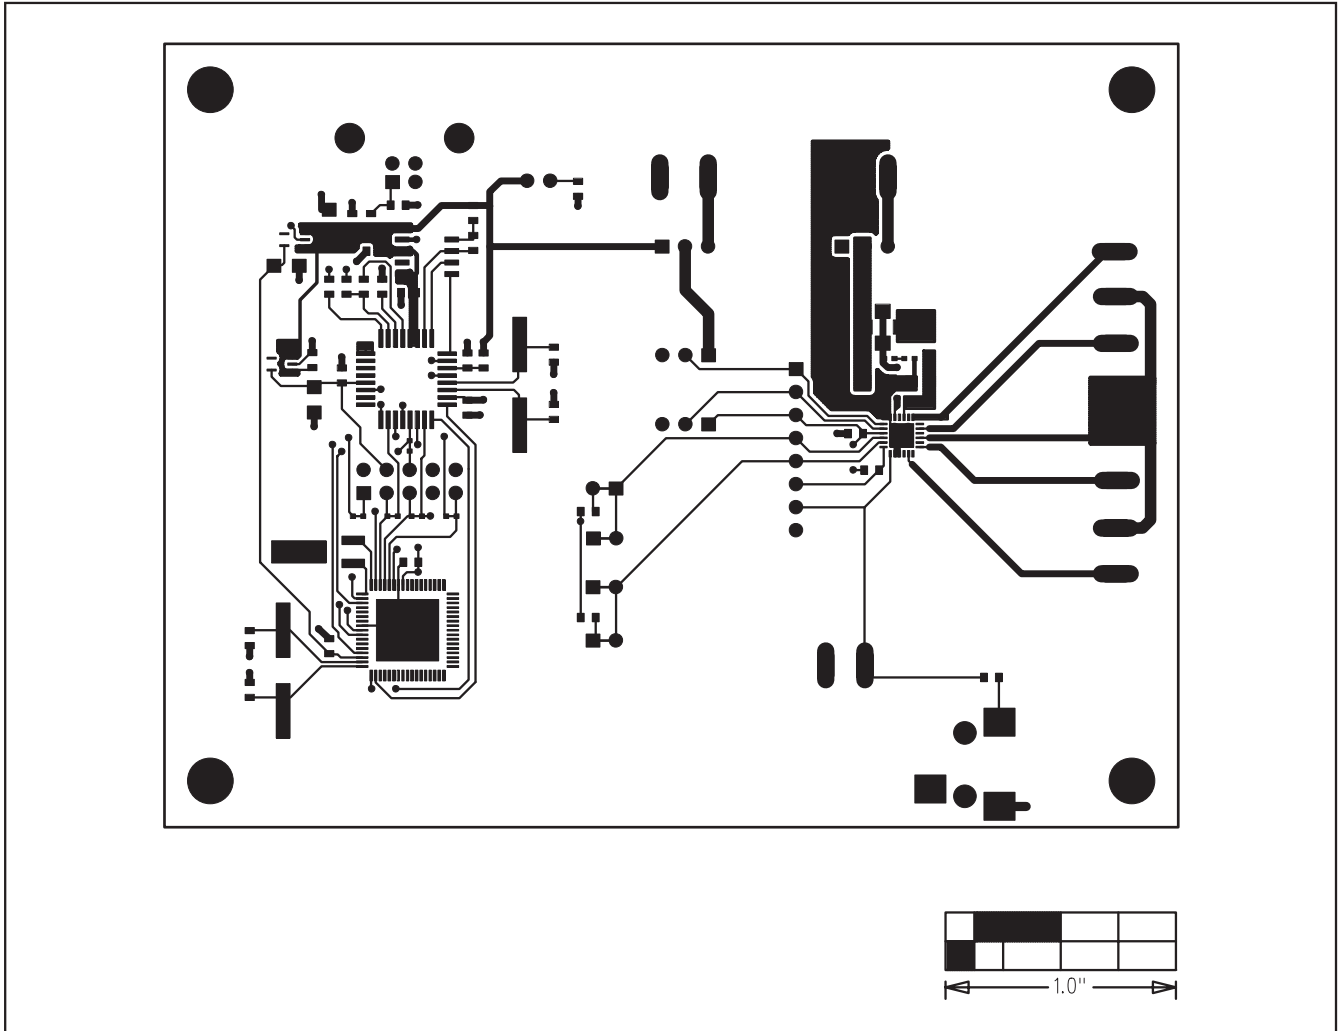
MAX14521E EV Kit PCB Layout—Component Side
